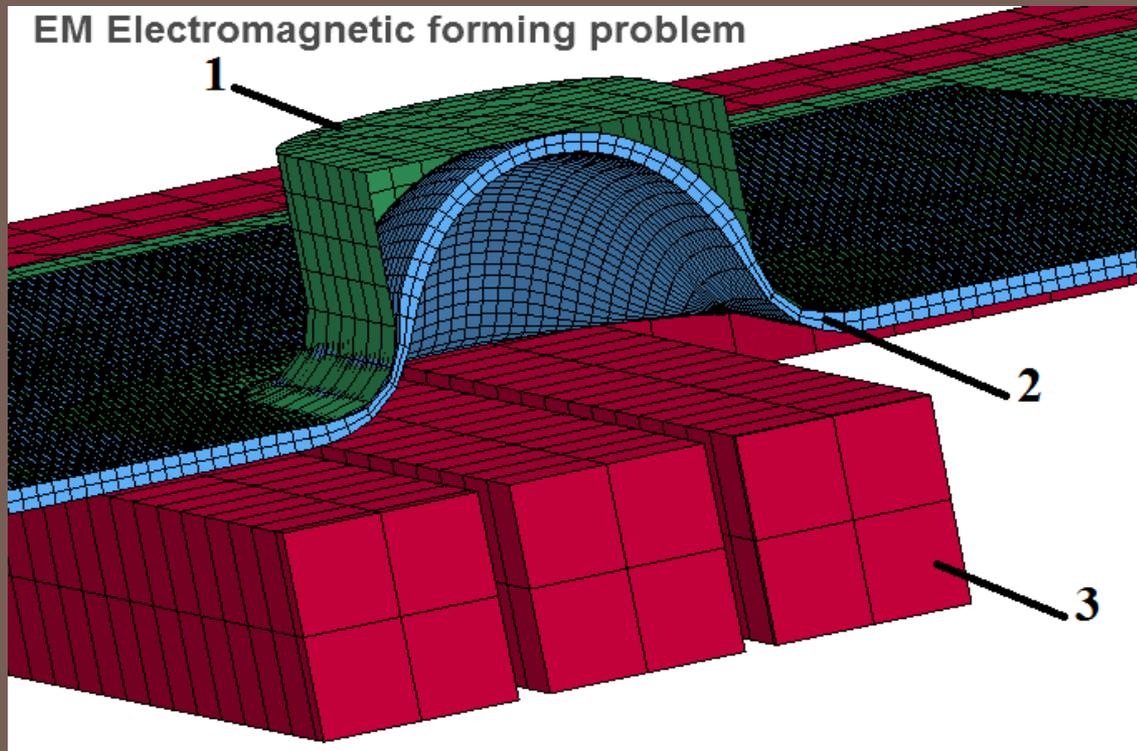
Cross section of a rift model: 1 – die; 2 – workpiece; 3 – coil.
